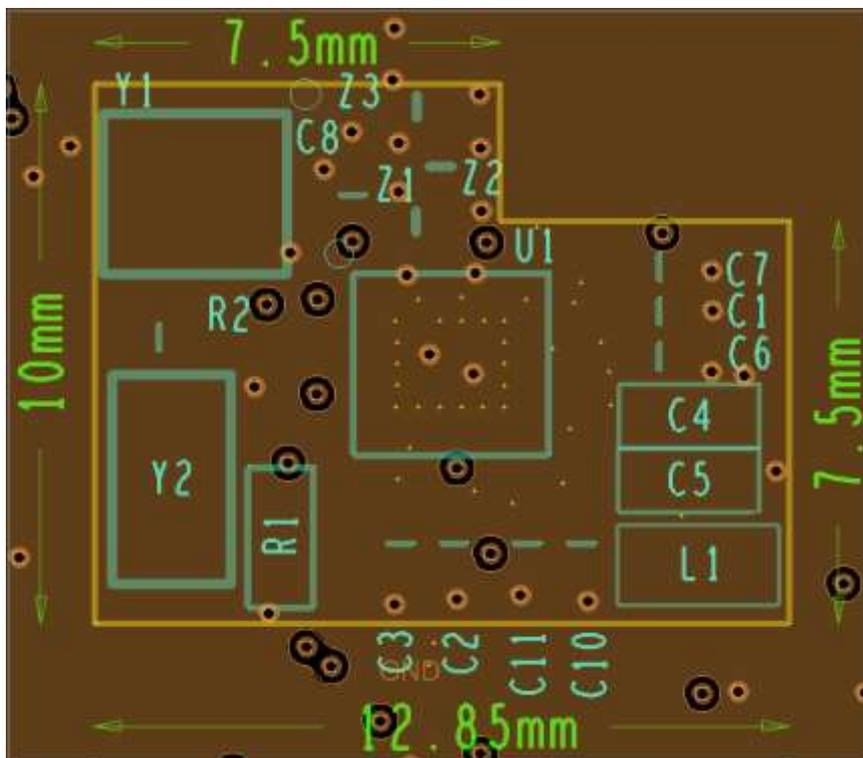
WLCSP53 PCB layout, layer 3, reference GND
